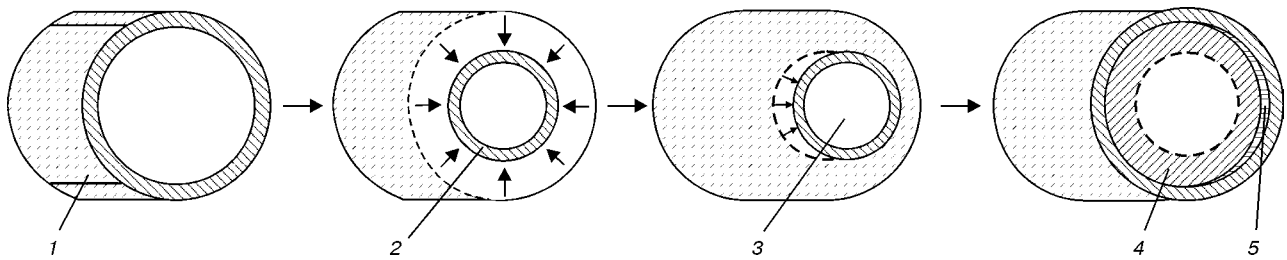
Scheme of cathode destroying of oxide film in a modulated current welding: 1 – oxidized surface of remelted weld metal; 2 – zone of cathode cleaning; 3 – surface of molten weld metal; 4, 5 – oxidized surface, melted at the moment of a pulse action (4 – weld; 5 – butt ahead of weld pool)
